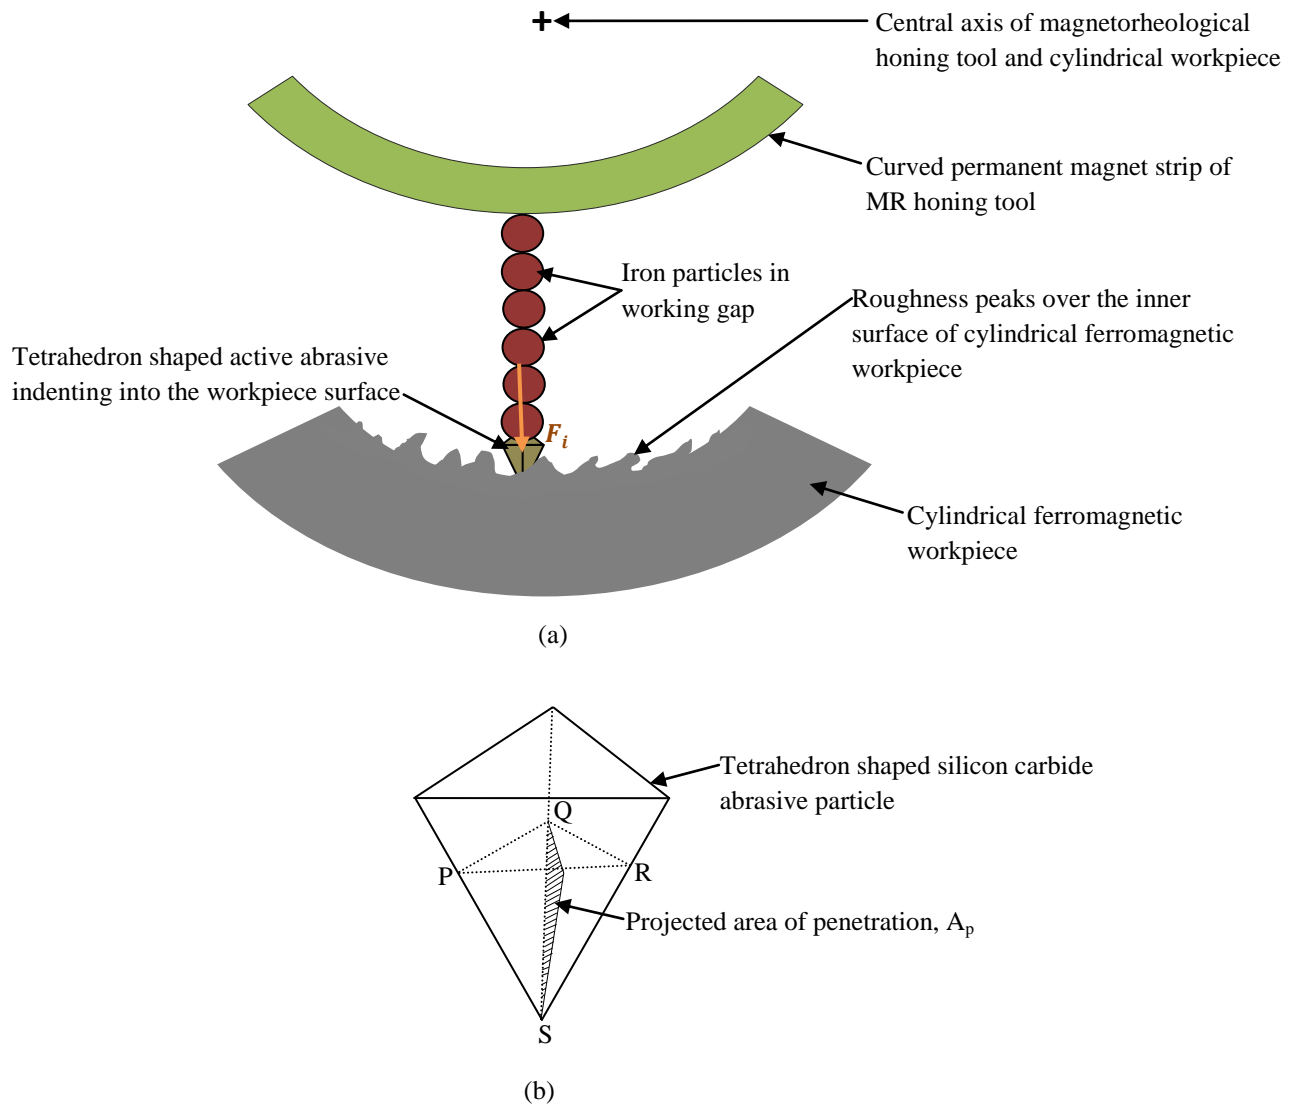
(a) Enlarged view of working gap showing active abrasive indenting into the inner surface of the ferromagnetic cylindrical workpiece and (b) geometry of active abrasive showing the projected area of penetration.
